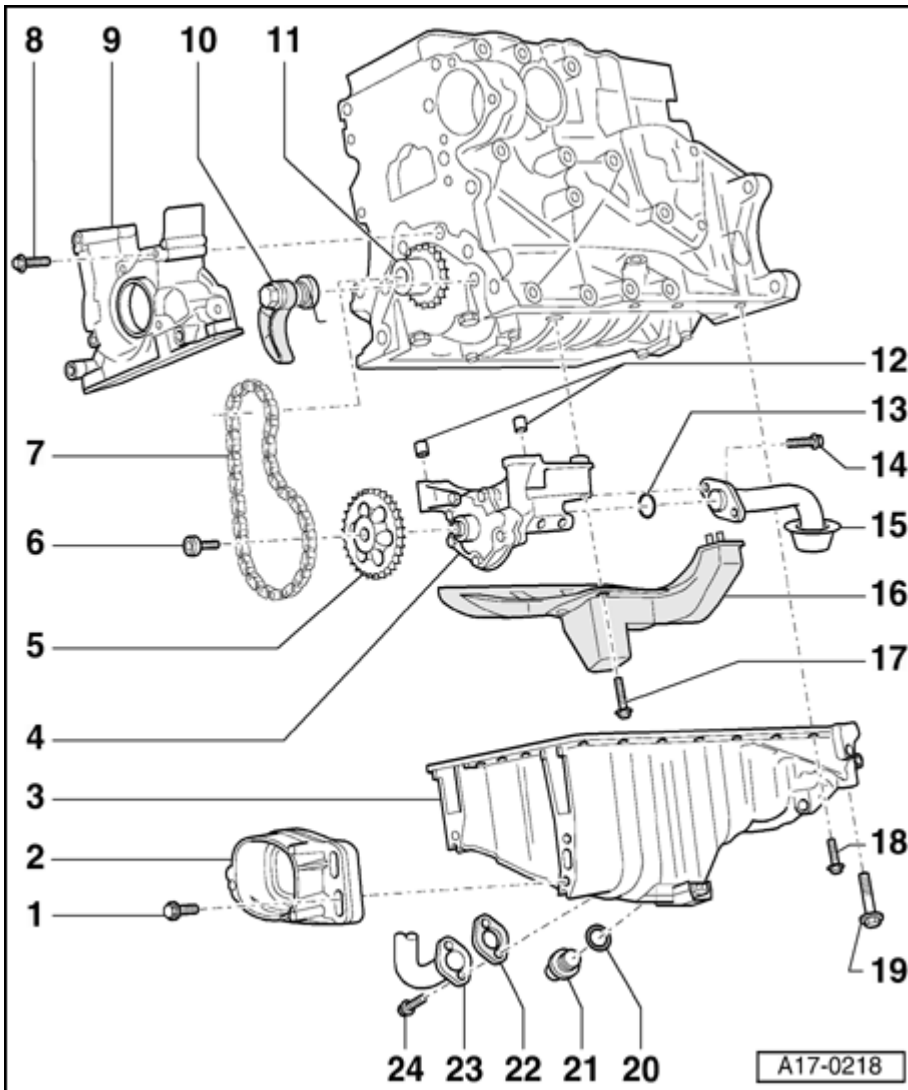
Lubrication System Components, Removing And Installing - Part I
